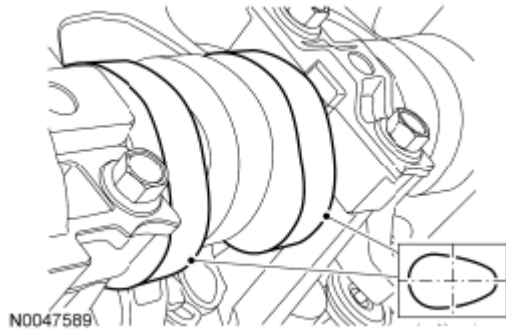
Identifying No. 5 Cylinder Camshaft Exhaust Lobe
